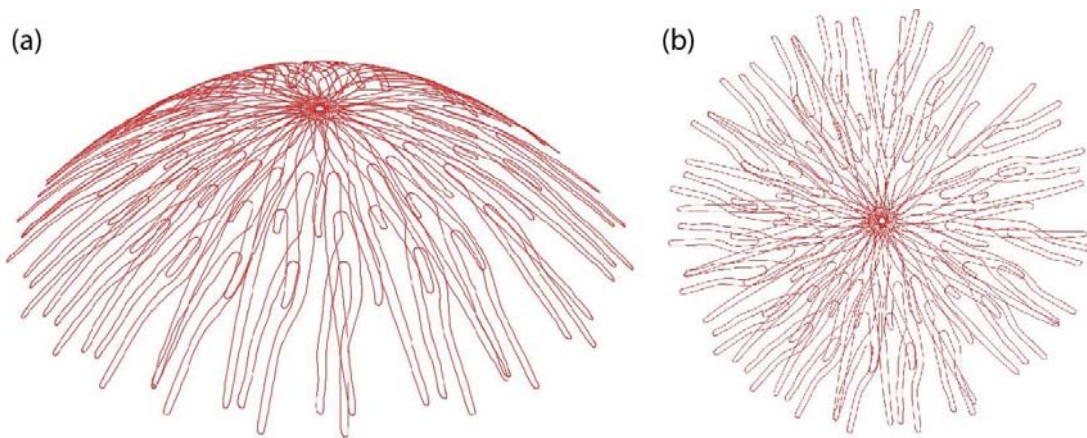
(a) Isometric view of the CAD design, and (b) top view of the CAD design
